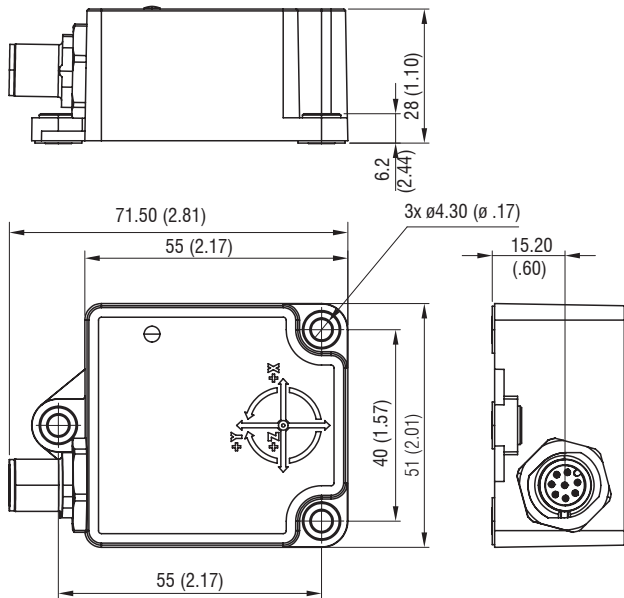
Dimensional drawing INC5502D-360/90-P-S-U und INC5502D-360/90-P-S-I, dimensions in mm (inches, rounded off)
